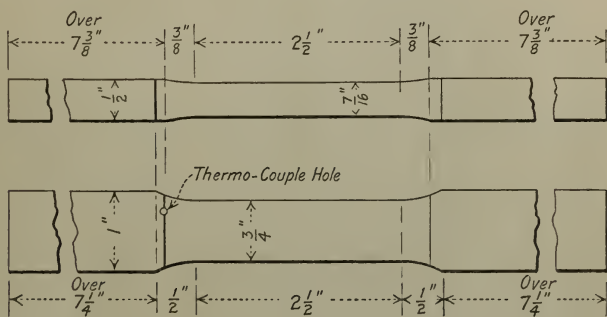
Form and Dimensions of Test Specimen Used by French.
